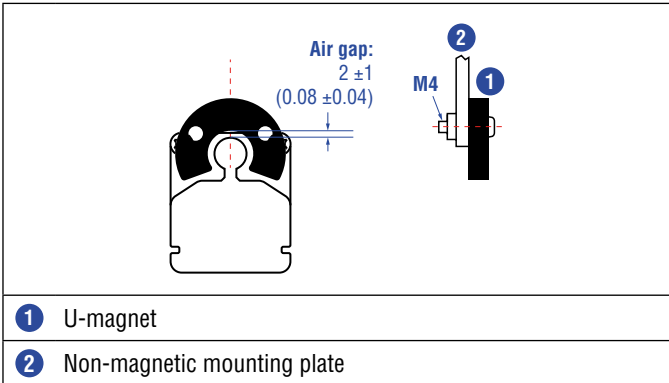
Mounting of U-magnet (part no. 251 416-2), example of EP sensor
